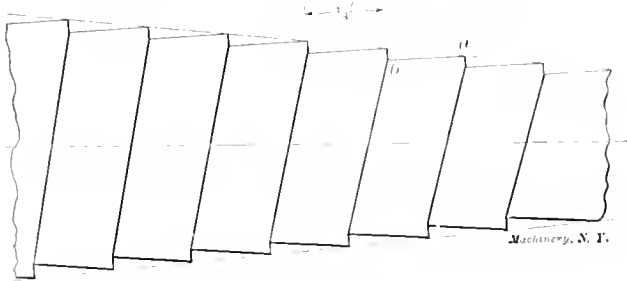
Method of Making Steep Taper Roughing Reamer.
